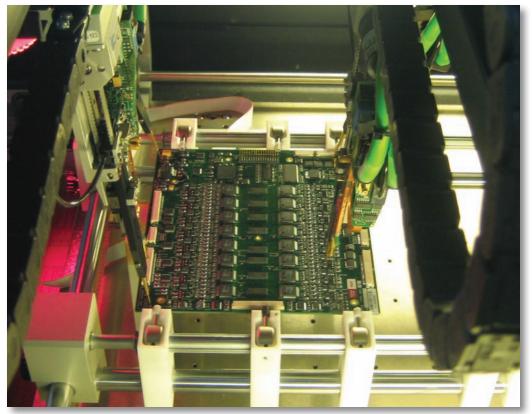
Packages like 0603s and 0402s have pads used as test points for flying probe testing.
